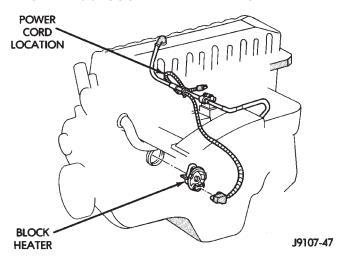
Heater and Cord—4.0L 6-Cylinder Engine
